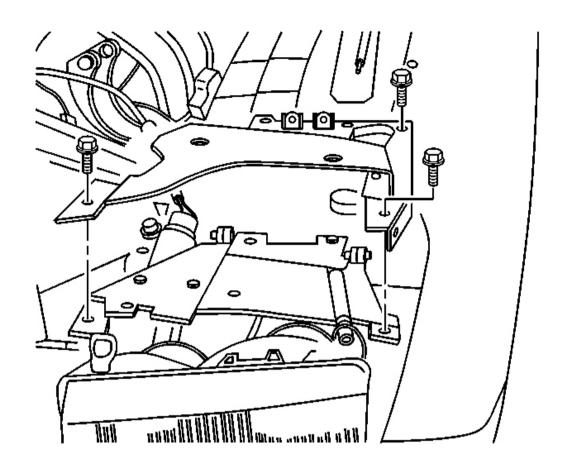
Headlamp Intermediate Bracket To Headlamp Courtesy of GENERAL MOTORS CORP.
